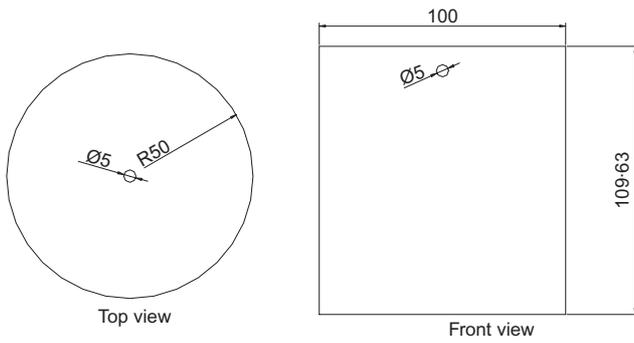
Flat-bottom tamper weight dimensions (units are mm)
